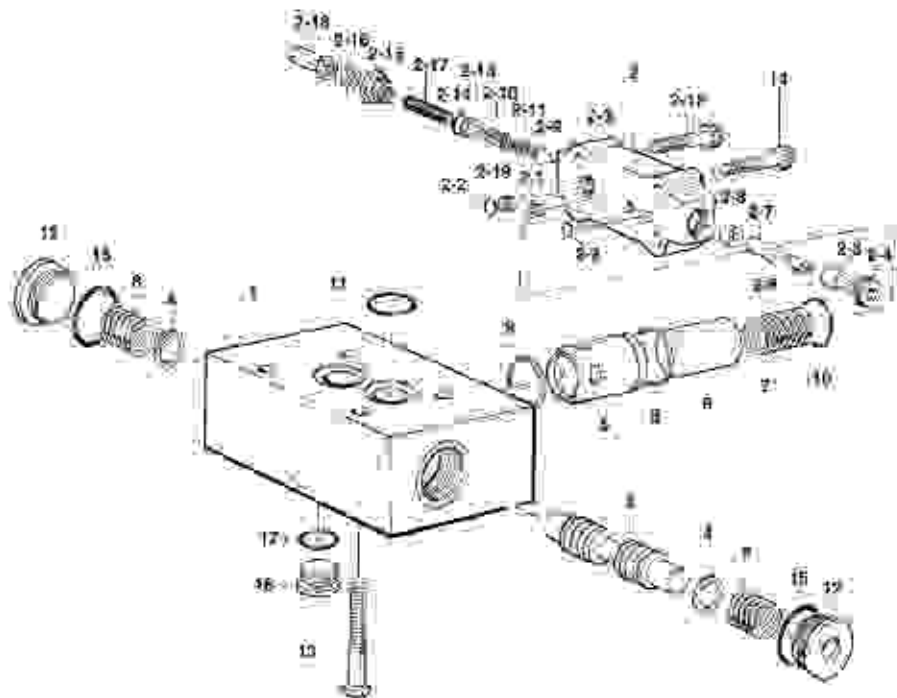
EXPLODED VIEW OF SHUTTLE VALVE
